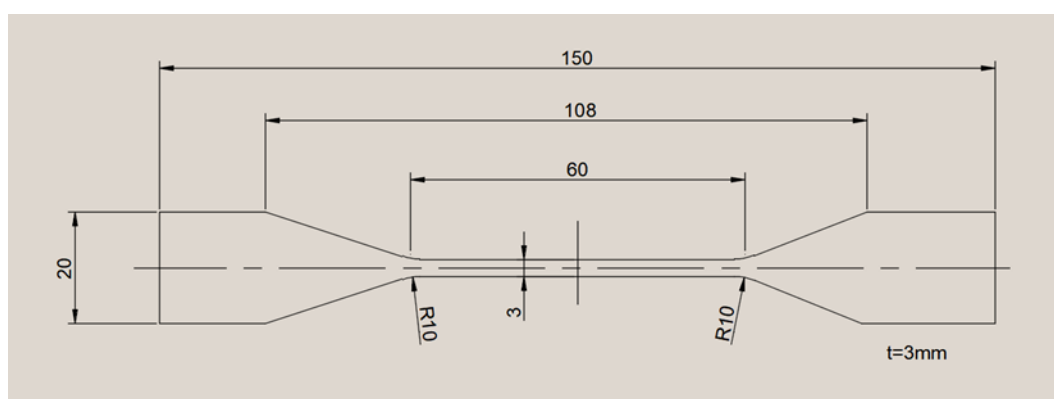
Dimension of dumbbell-shaped test piece made of PTFE.
